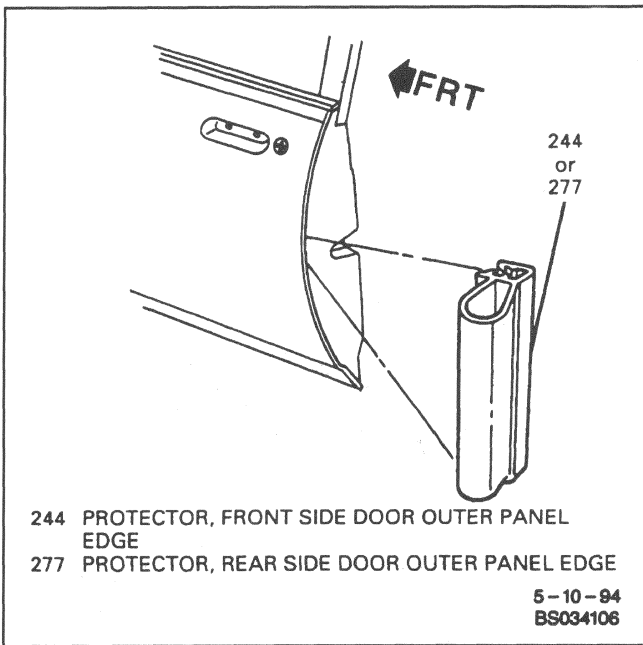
Removing Front and Rear Side Door Outer Panel Edge Protector
